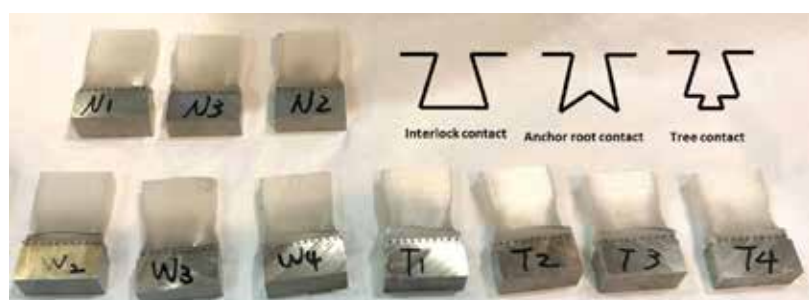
Printed metal/polymer specimens for tensile strength testing.
